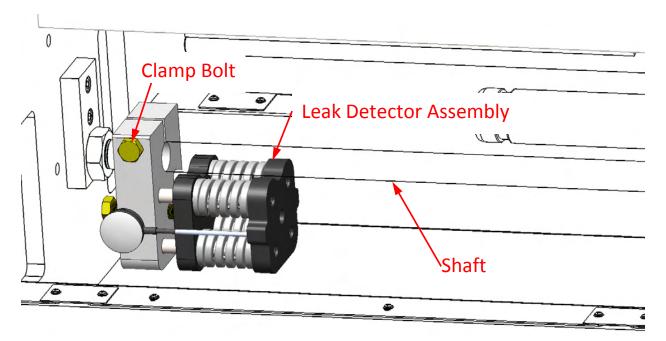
Leak Detector Mount C01-000061-000, Stowed Position
